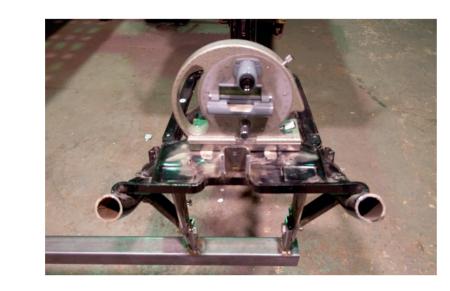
Mounting of the protractor used to measure the vehicle frame twist angle
